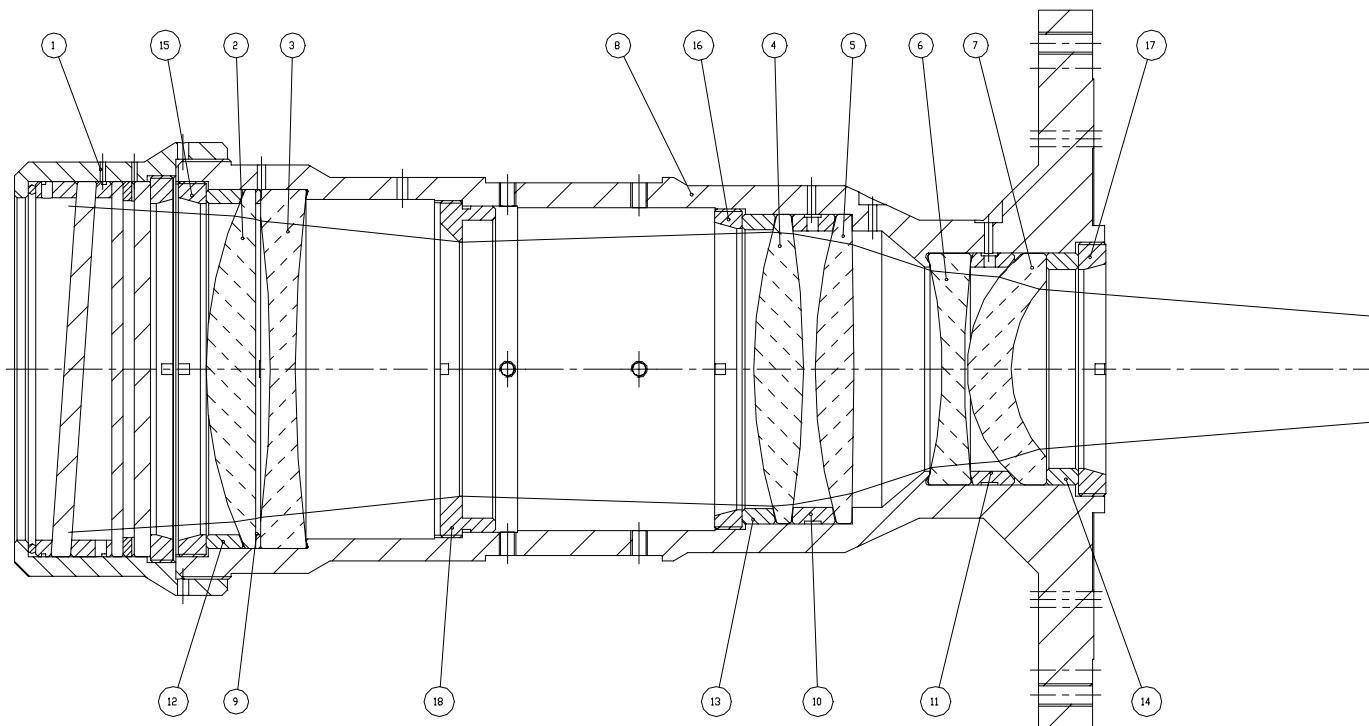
Optical system layout. 1: filter assembly housing; 2-7: lenses; 8: lens barrel; 9-14: spacers; 15-17: retainers; 18: aperture stop.
